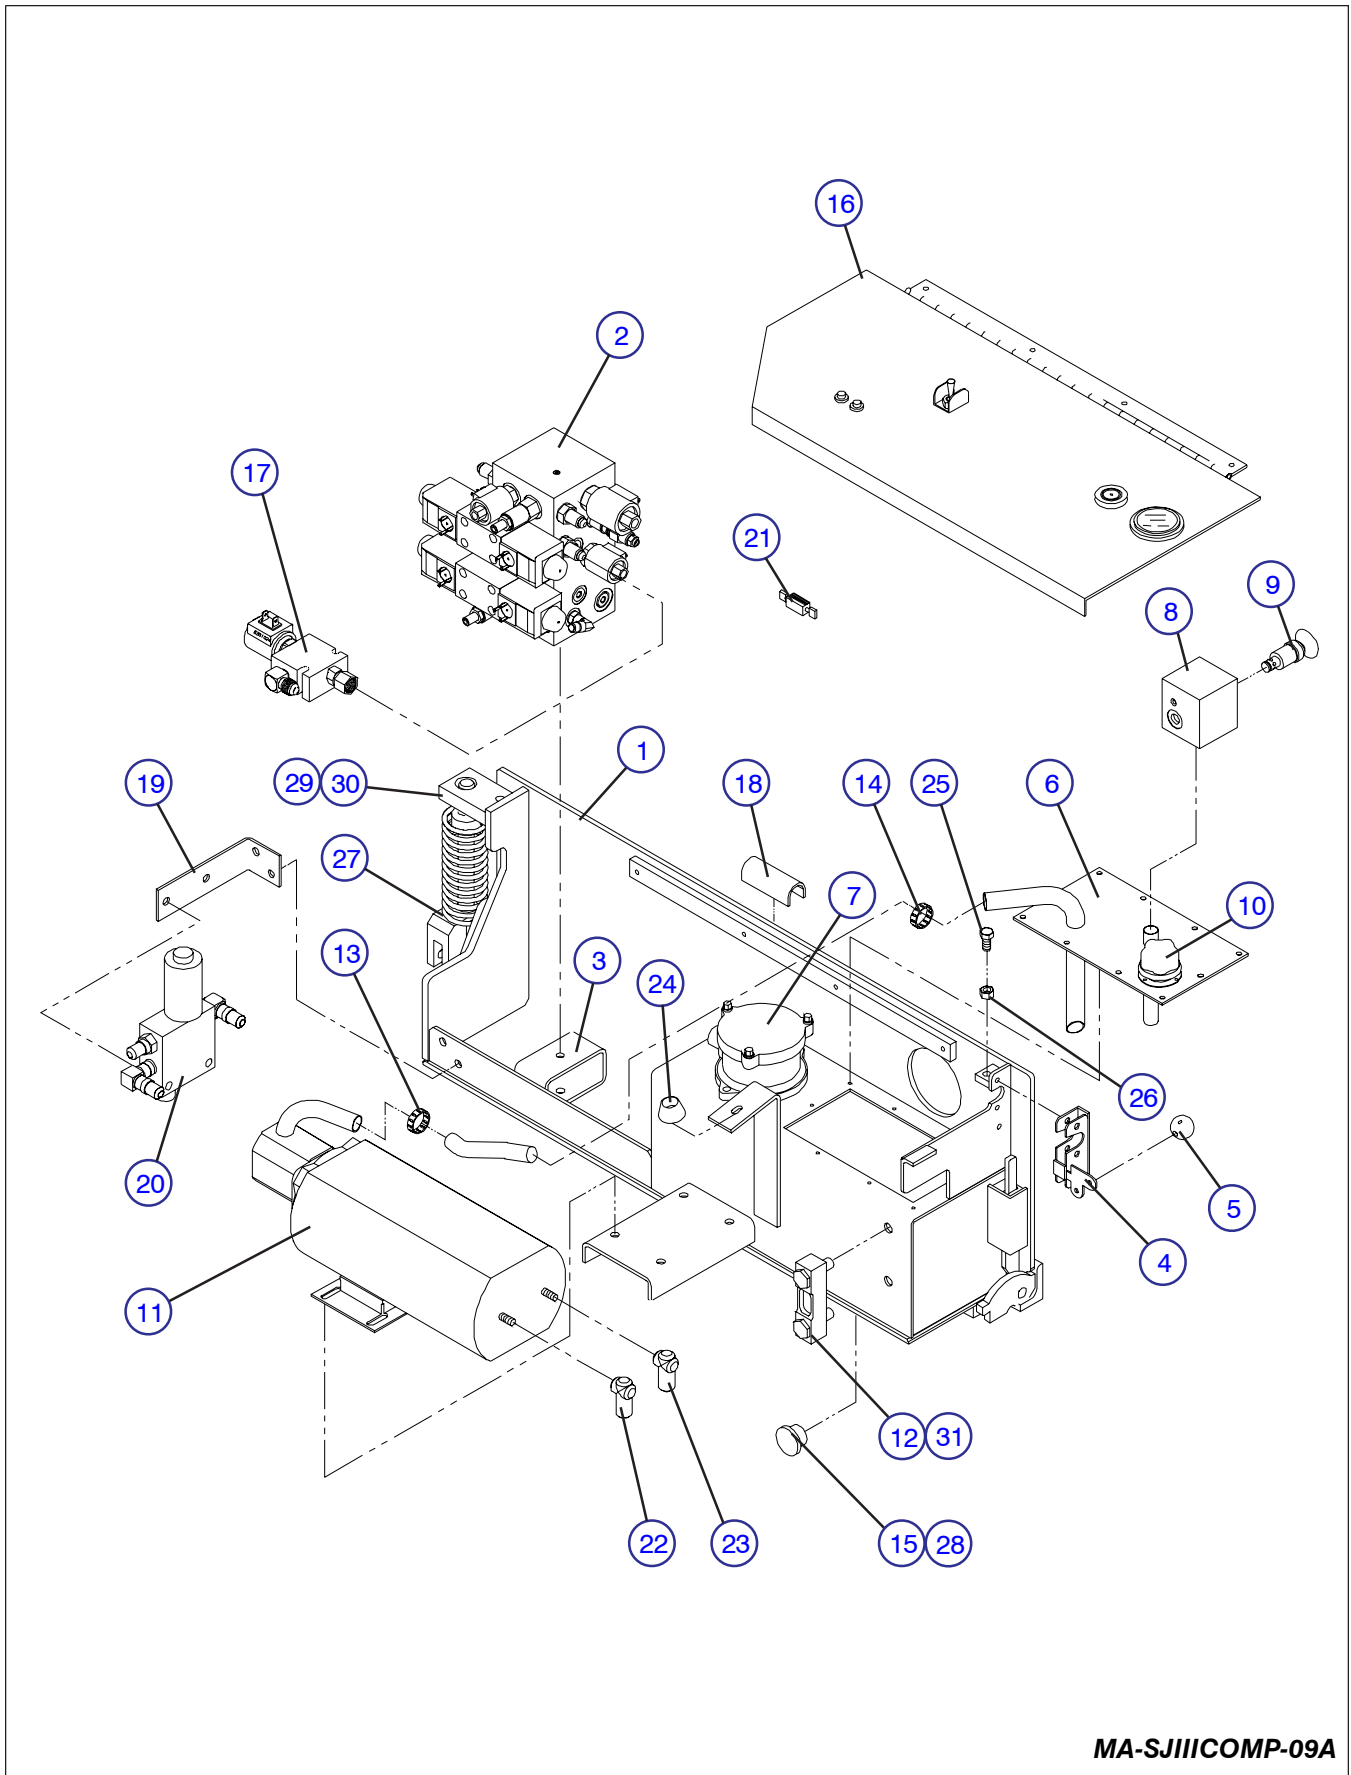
PROPORTIONAL VALVE MANIFOLD ASSEMBLY
